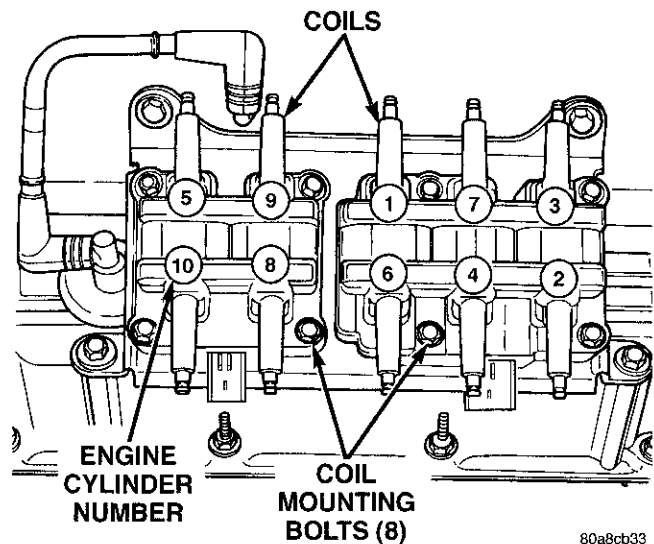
Ignition Coil Packs—8.0L V-10 Engine
